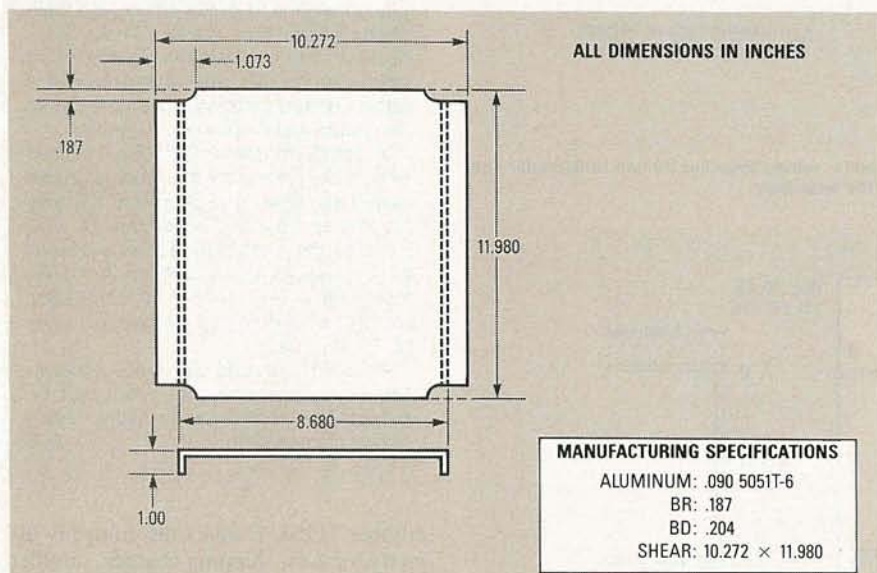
CUTTING AND BENDING GUIDE for the end covers. Due to the thickness of the aluminum used, the covers must also be notched for proper fit.
